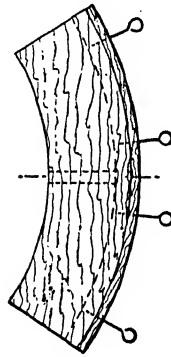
A Swept Pattern Segment, from which a ring is moulded
